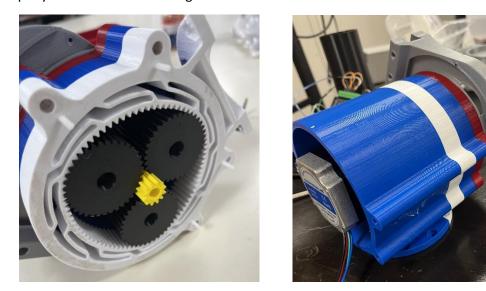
Dowel pins on the outward surface of the newly completed gearbox
